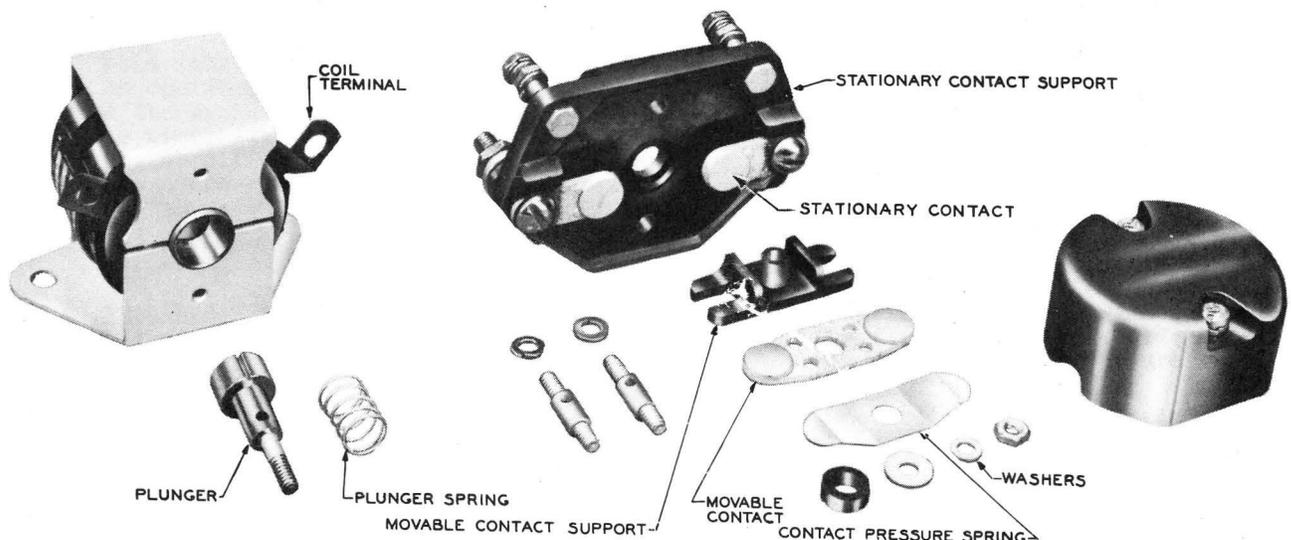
Single-pole, 50-ampere Contactor, Exploded View
